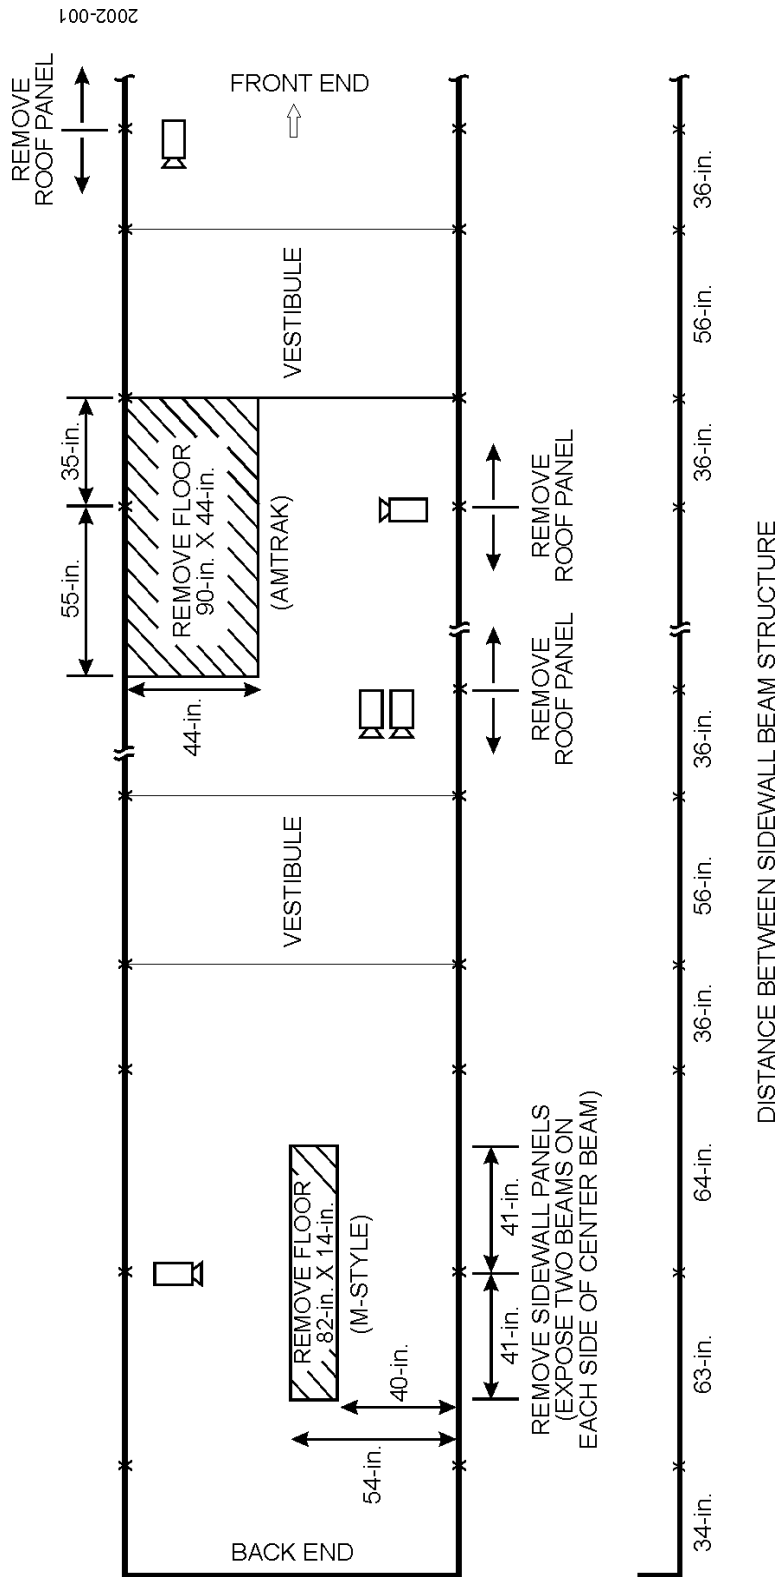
Floor Removal Plan for Experiments No. 2-1 and 2-2 in the First Trailing Coach Car
